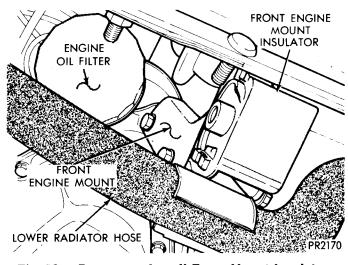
Remove or Install Front Mount Insulator Through-Bolt and Bell Housing Bolts
